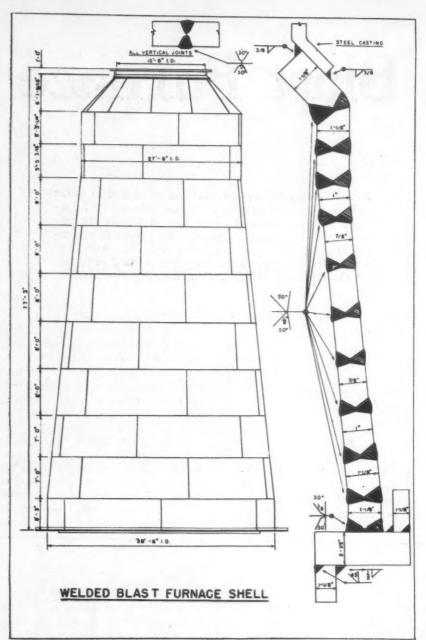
Details of the joints for the welded blast furnace shell. Plate thickness ranged from 1/8 to 11/8 in. The horizontal joints are double V and the vertical joints, double U type.
